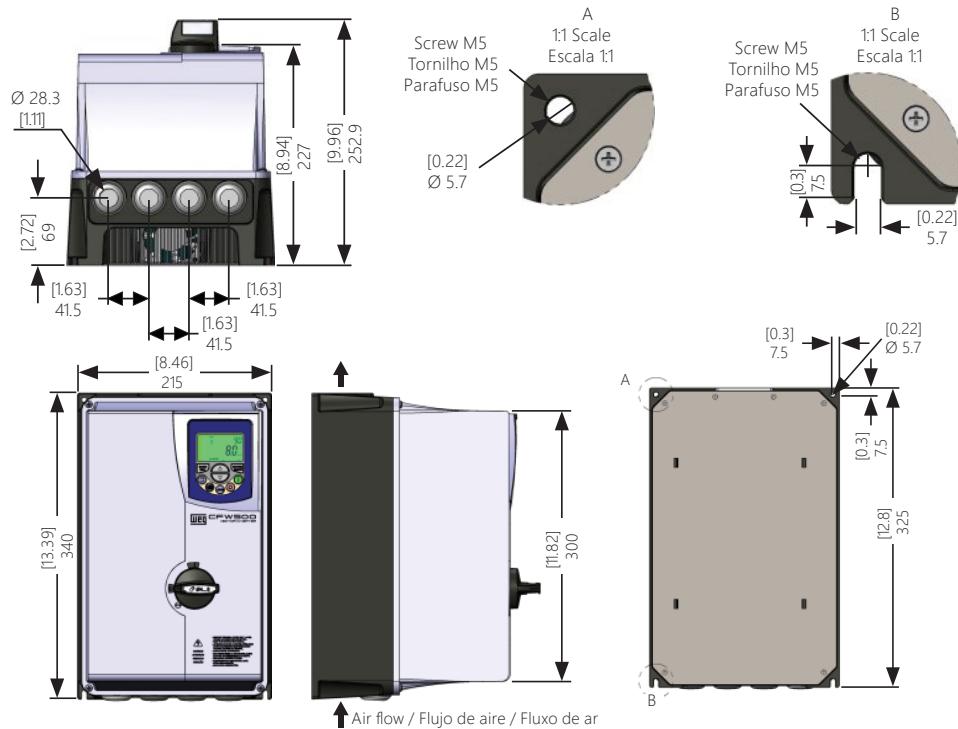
Dimensions of the CFW500 IP66 frame size B
